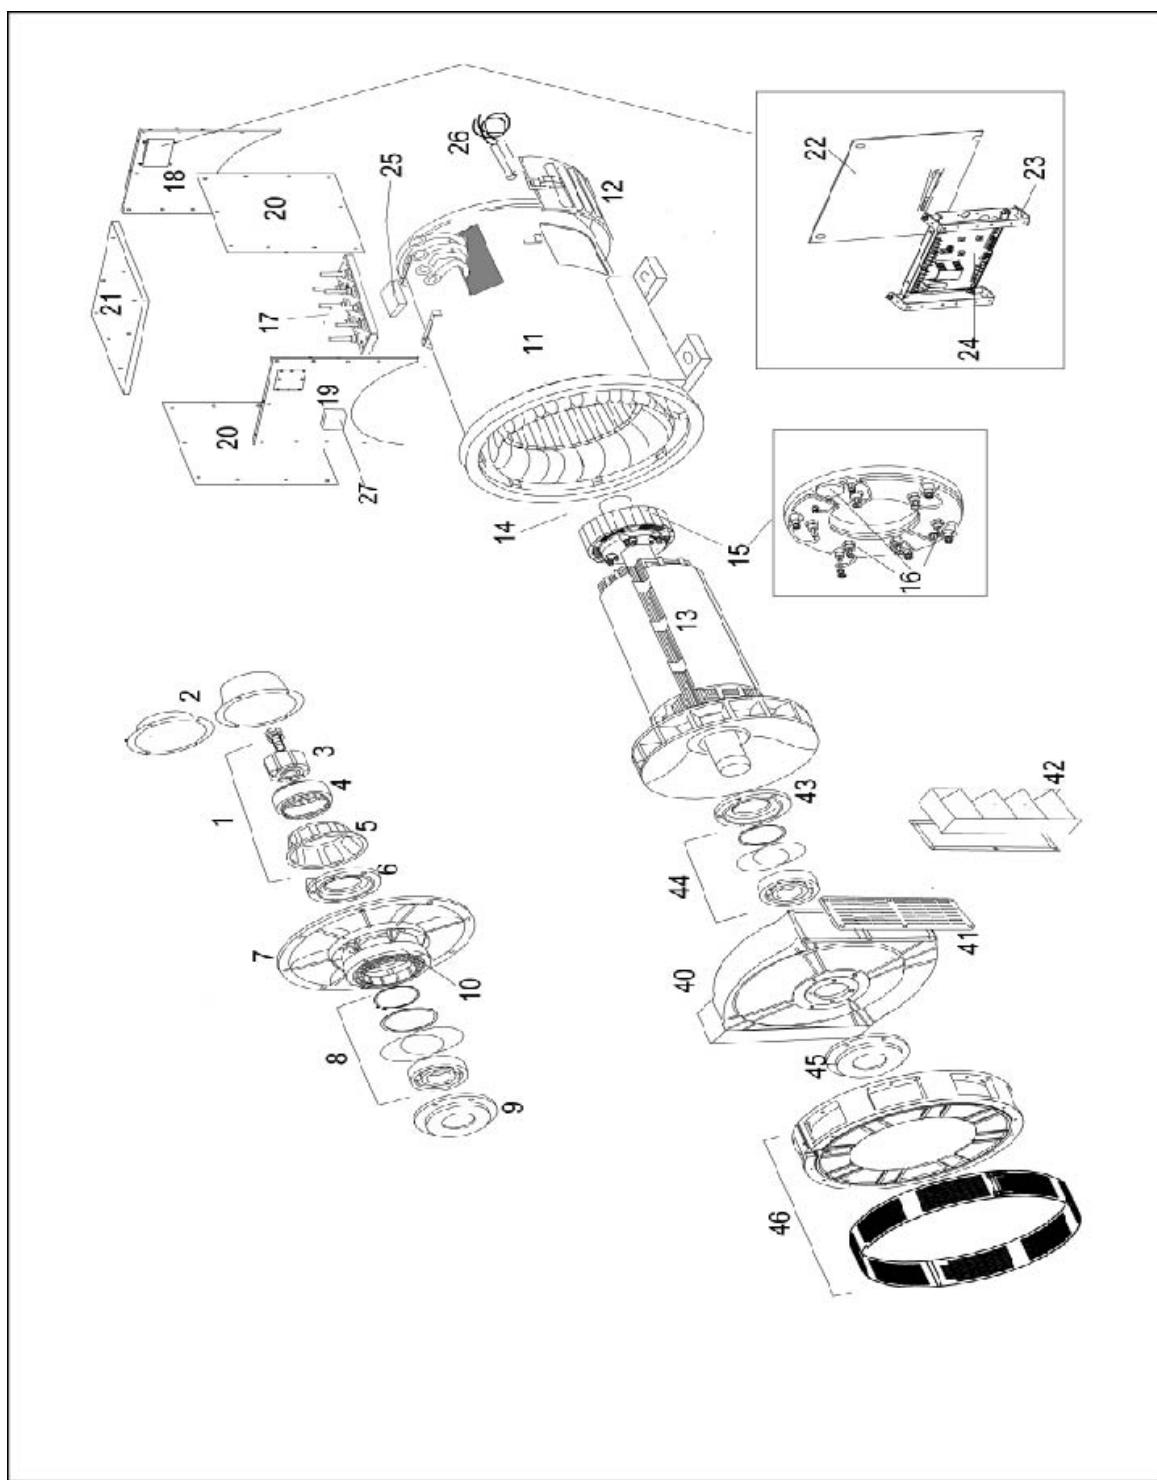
HC4 TWO BEARING ALTERNATOR
